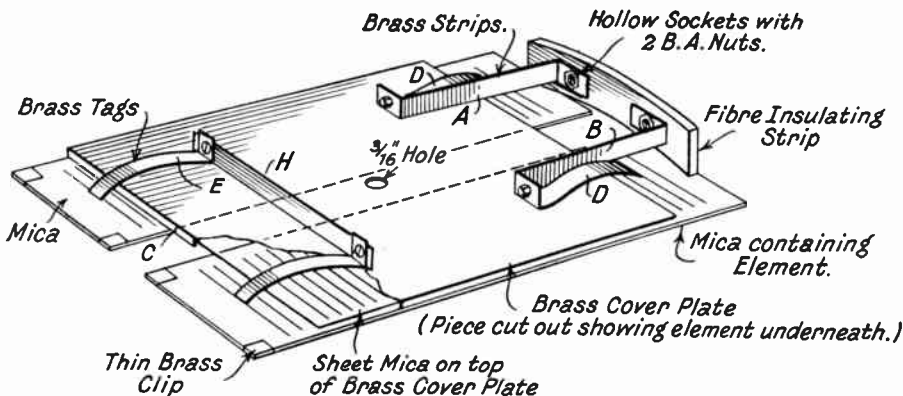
THE LAYOUT OF THE ELEMENTS AND COVER PLATE.
